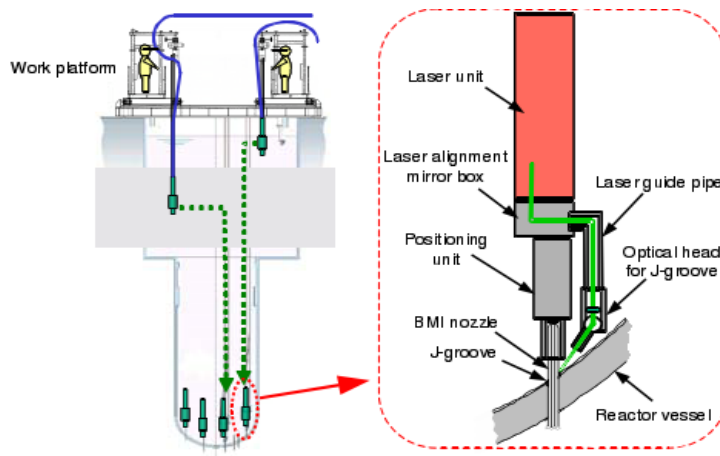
PLP system for J-groove welds of BMI nozzle
